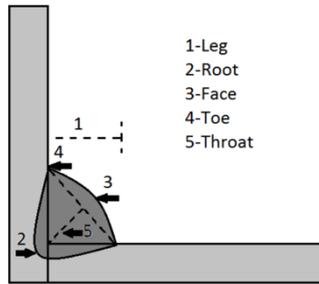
Diagram of the fillet welds parts name (Wikipedia, n.d.)
